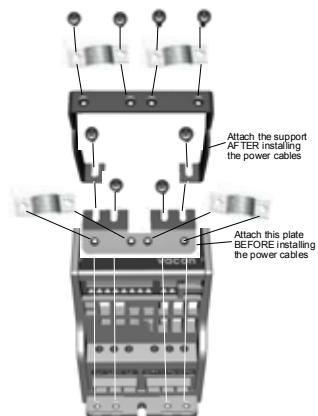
Attaching the PE-plate and API cable support, MI1 - MI3
